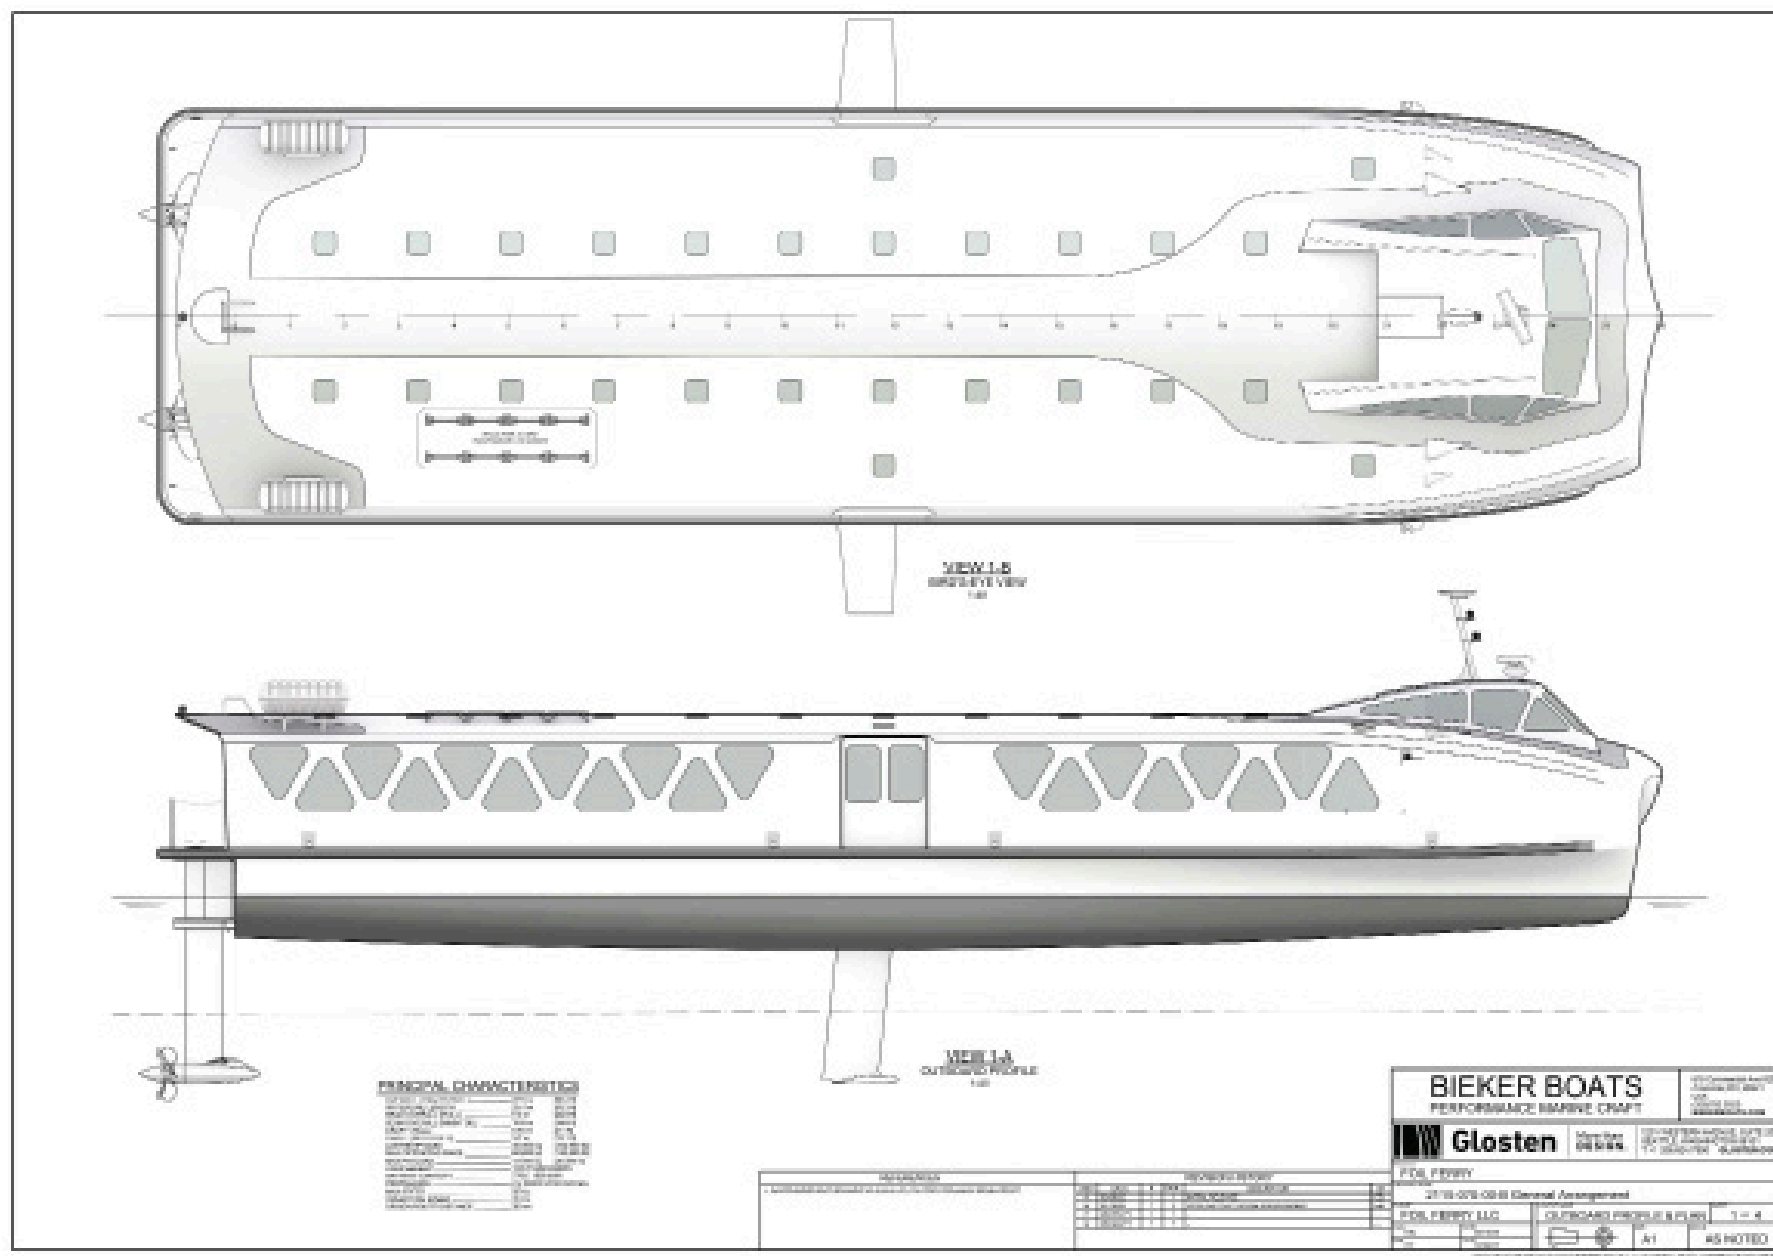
General Arrangement View 1-A and 1-B, outboard profile and birds-eye view
